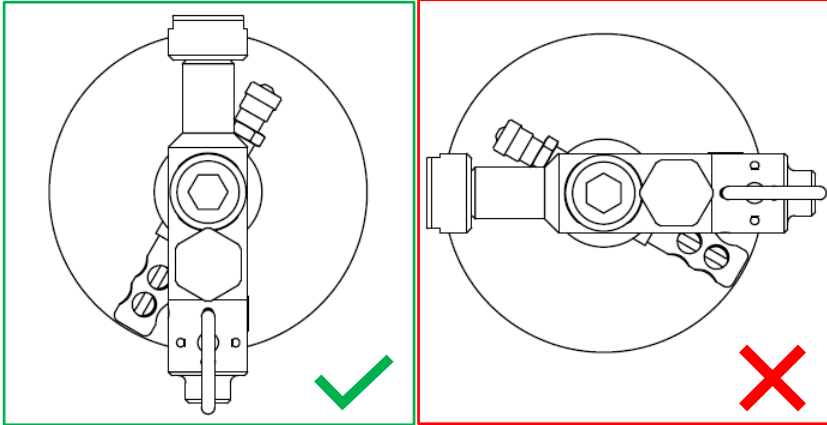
Pressure gauge should face upwards (left), not horizontally (right)
